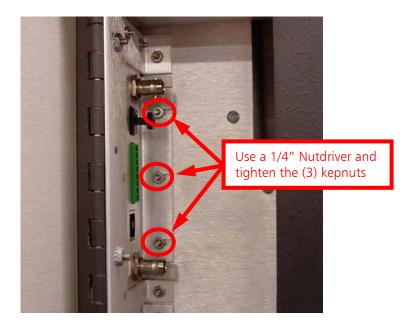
Tighten DSP Exciter Mounting Bracket Hardware
